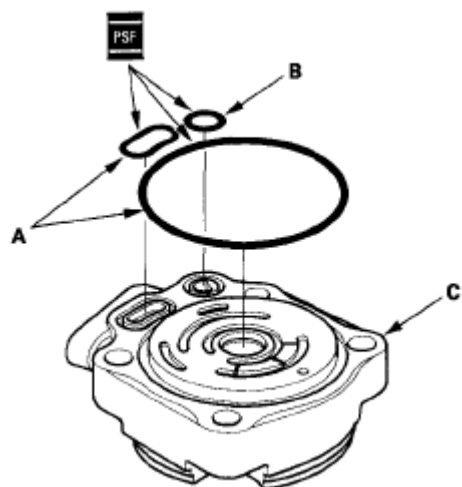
Identifying O-Ring Position Into Grooves On Cover
